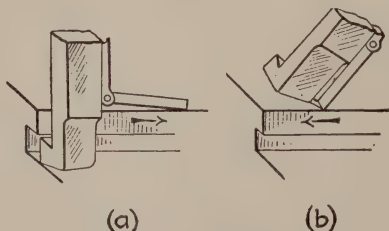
Shows tool lifter; (a), cutting stroke, (b), return stroke.
